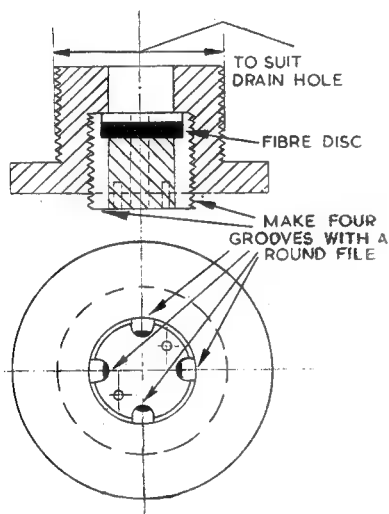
Section and underside views of "silent" crankcase breather-valve
